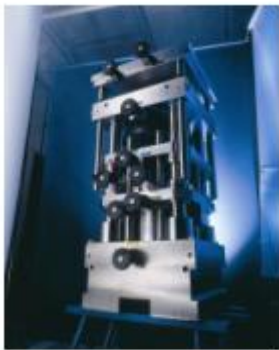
400 to Sizing Adapter in Multi-plate Design
